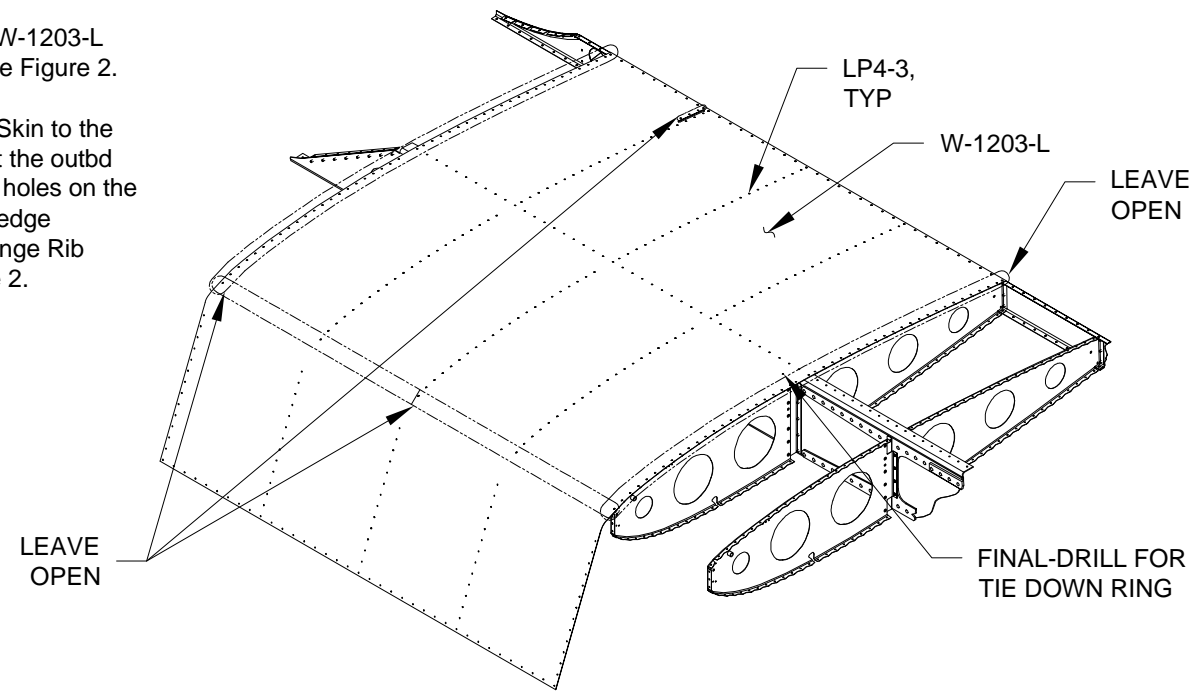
ATTACHING OUTBD WING SKIN (LEFT WING SHOWN)
